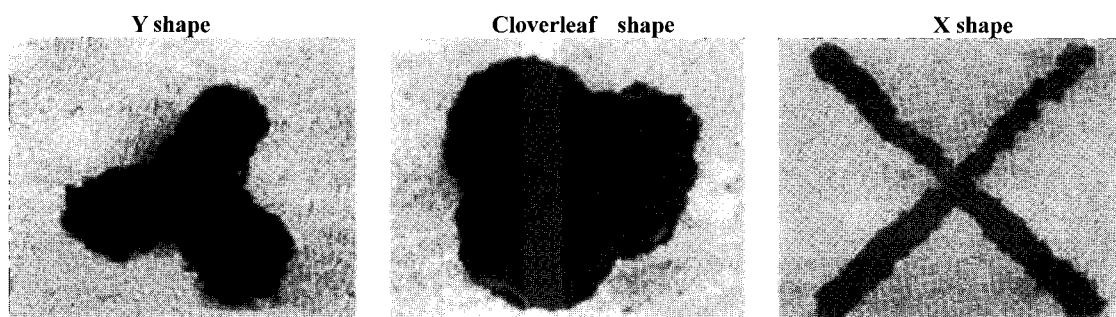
(c) Machined workpieces using the deposited electrodes from EDM
